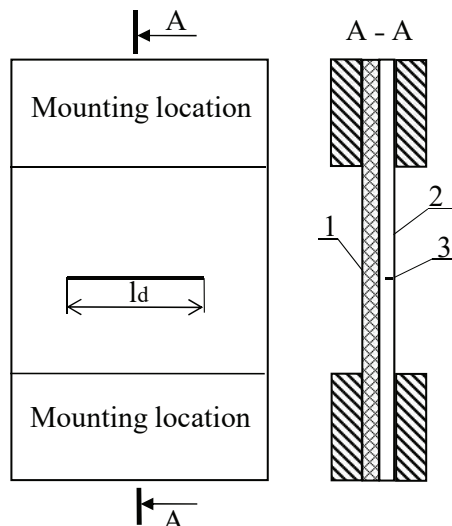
Placement of damage on the hose: 1 – waterproofing layer; 2 – power frame; 3 – place of damage
